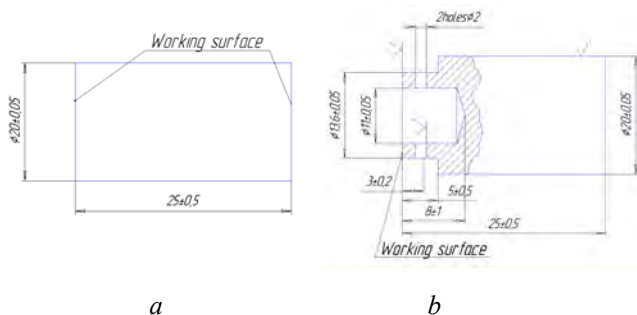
The scheme of the specimens for materials and coverings testing in liquids and gas environments: *a* – specimen, *b* – tested specimen
